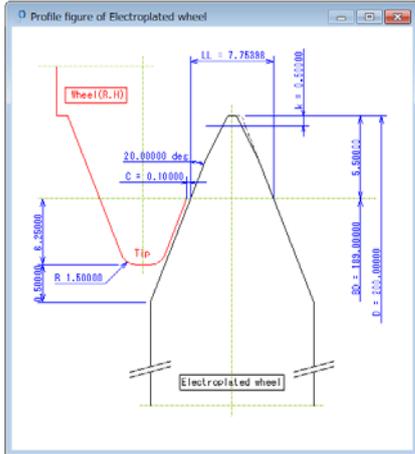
Dimensions of electrodeposition grinding wheel
